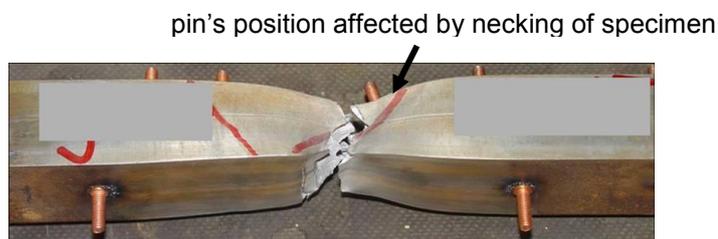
A tensile test specimen, on which spot-welded pins were welded to mount LVDTs and clip gauges.
